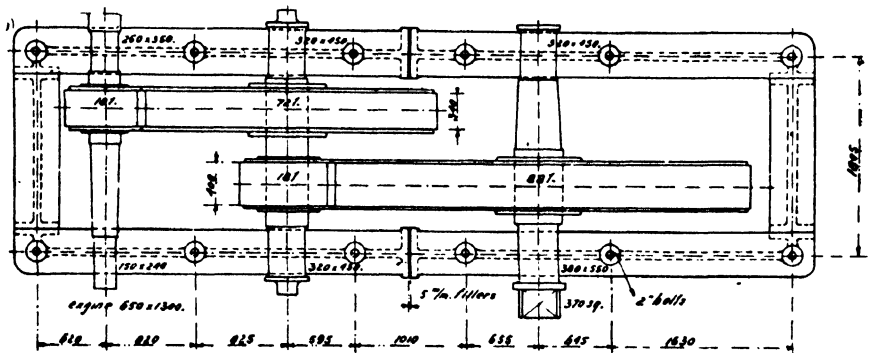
Individual Low Type Gear for 34 in. × 72 in. Mill.
